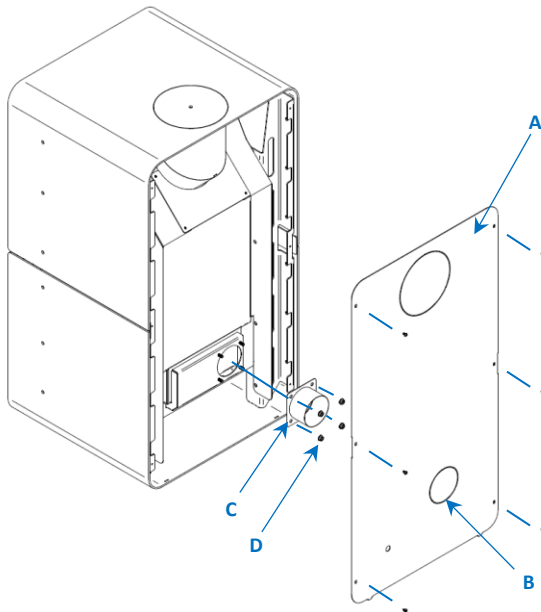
Section to be eliminated (B) for placing the external air inlet (C)
